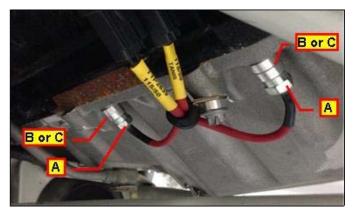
Example of element replacing lower crankcase fastener aft of oil pump. Alternate crankcase location on Rotax 912, 914, and 915 series engines. Location does not use spacer or washer. Suggested torque: 10 Nm / 90 in-lbs.
